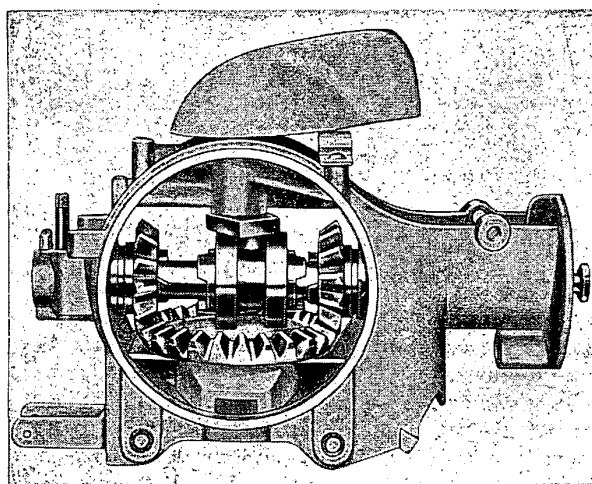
Simple reverse gear shift. (Courtesy of Gleason Works, Rochester, N.Y.)
